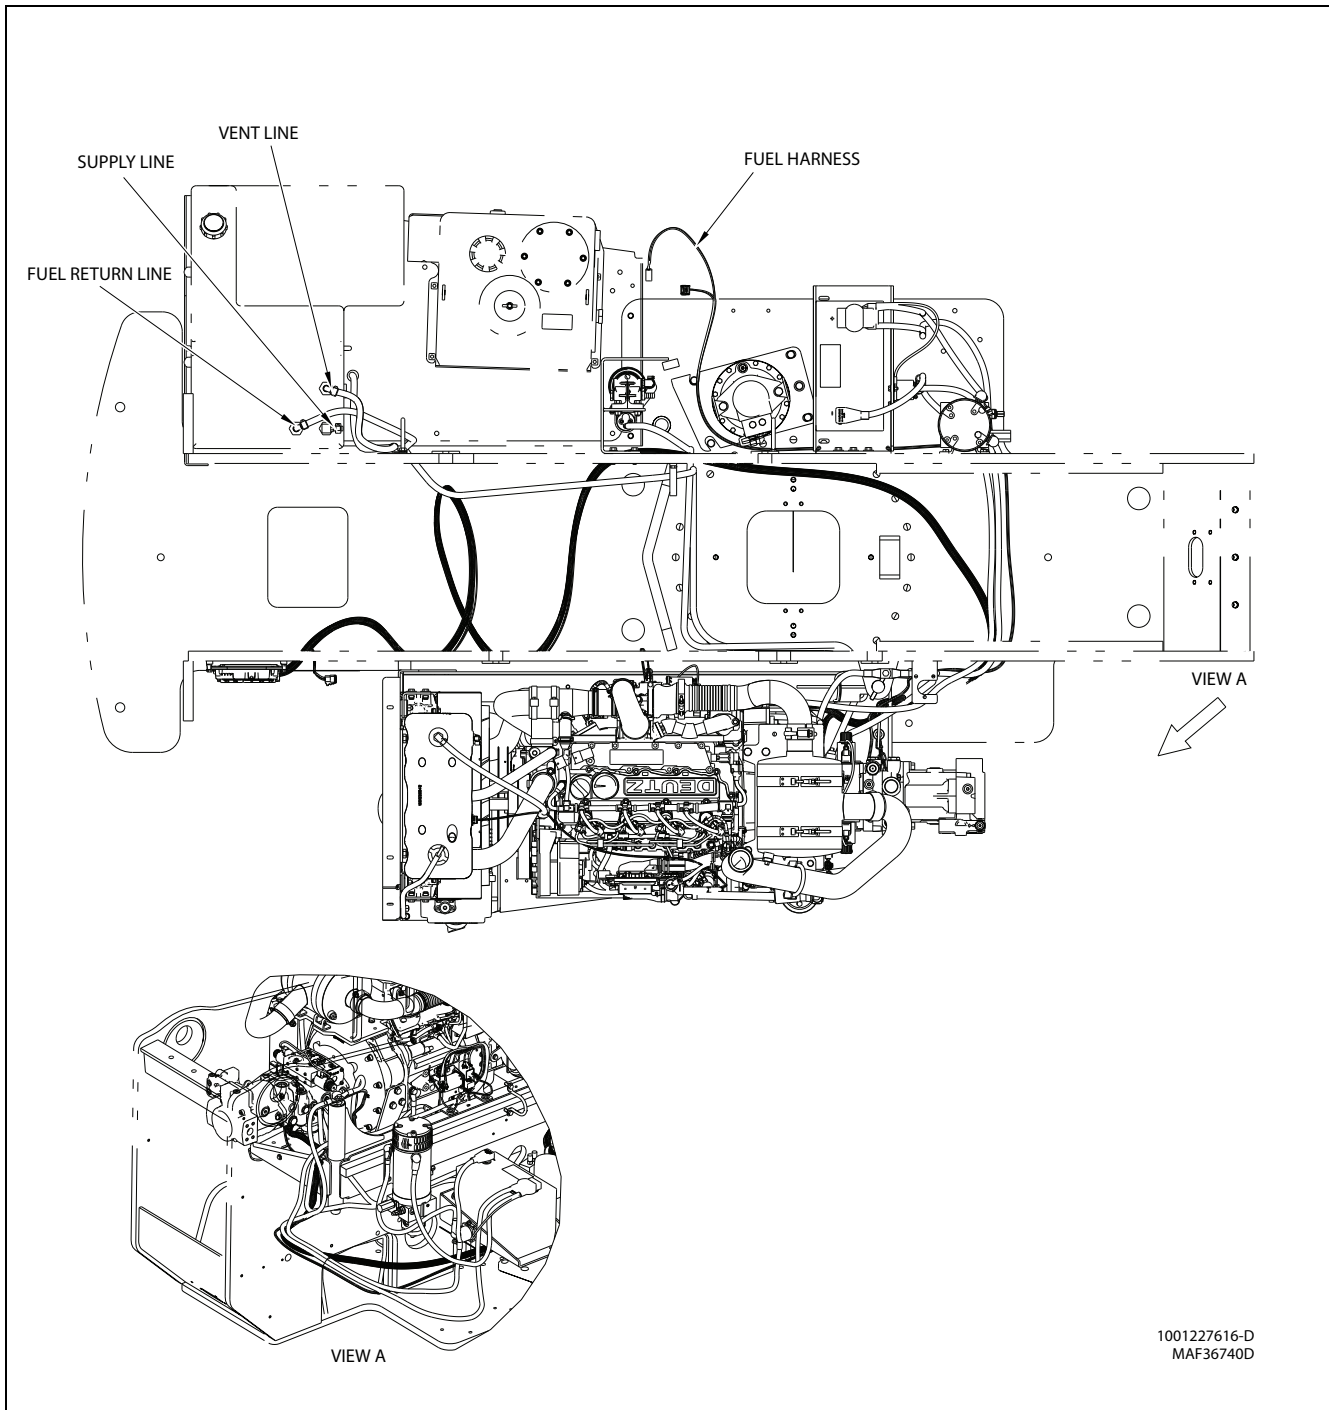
Deutz TD2.9L4 China III Engine Installation - Sheet 1 of 7
